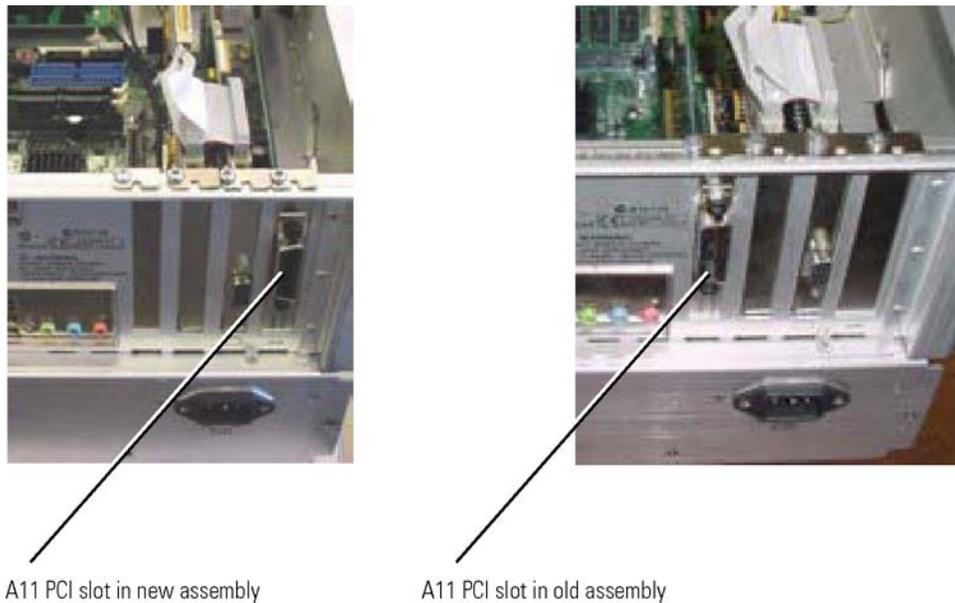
A11 Location in A4 Assembly PCI Slots
